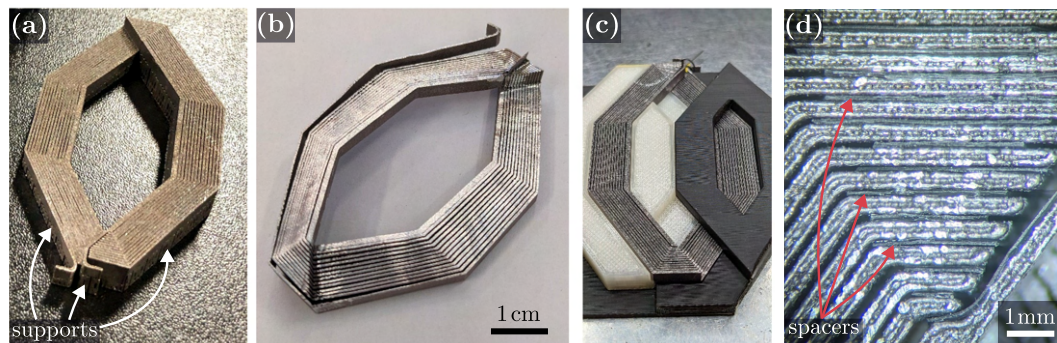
Insulation process of a coil with *in-plane* distributed turns: (a) printed coil with supports; (b) coil after support removal; (c) bench maintaining the coil in position, and (d) zoomed view of the coil head with thin plastic spacers placed between the aluminum tracks.
